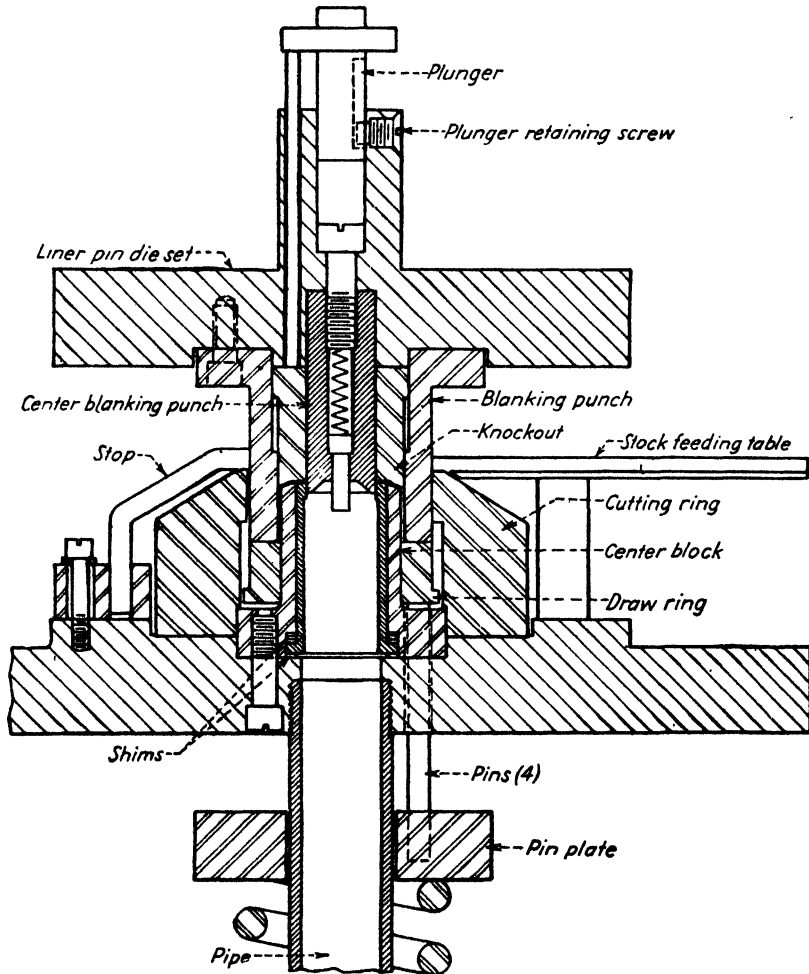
This die for thin stock combines center blanking with blanking and drawing. The blank is drawn before the center punch cuts to avoid distortion of the center hole.
